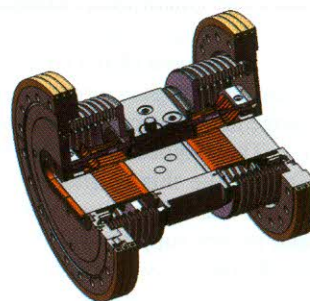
Sectional 3D view of IDBPI with RF-shielded bellows
